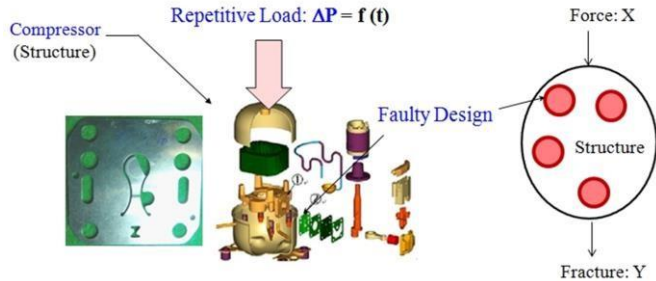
Failure of the compressor structure caused by repetitive pressure load and its design defects.
